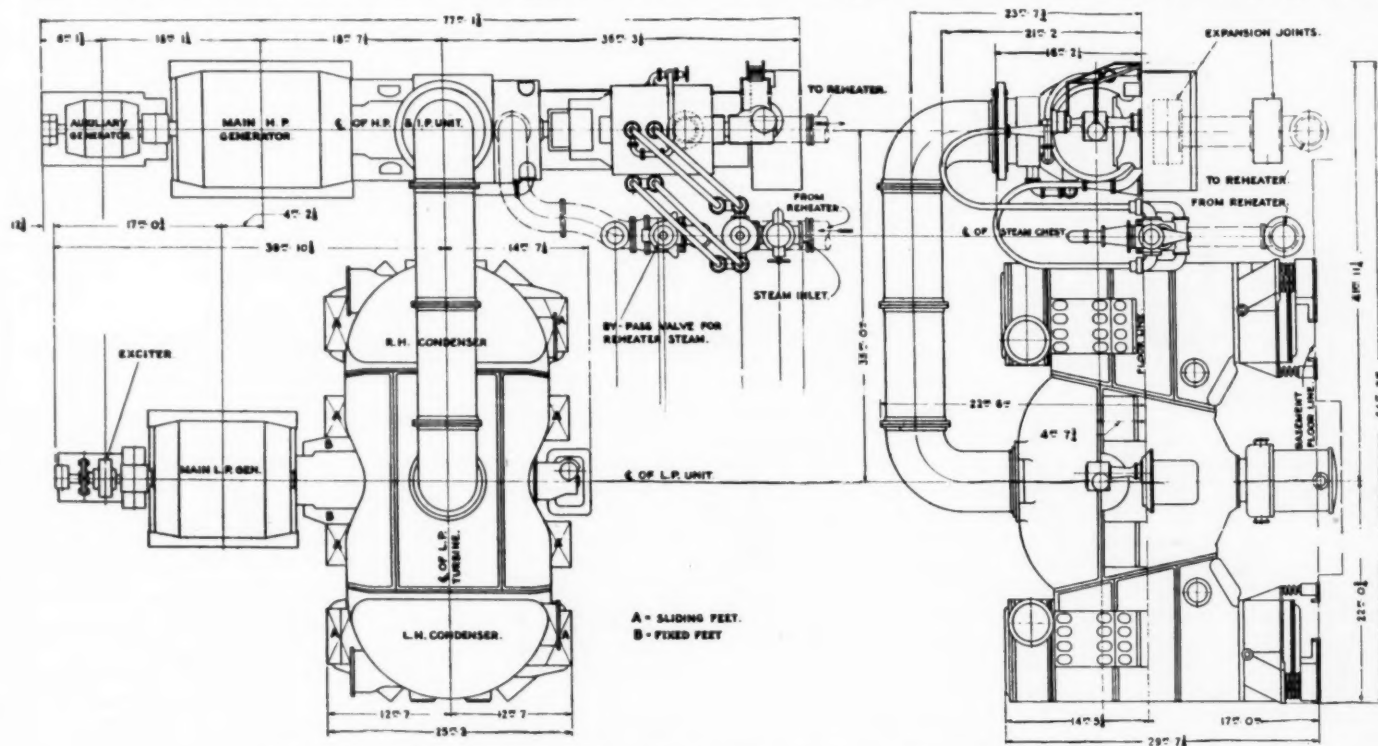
50,000-KW. UNIT TANDEM COMPOUND BEING BUILT BY THE WESTINGHOUSE COMPANY
